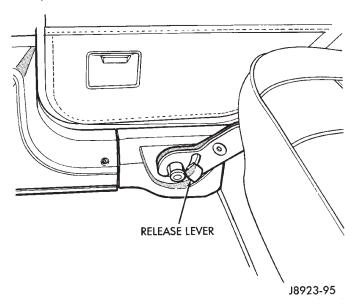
Seat Cushion Disengagement At Front INSTALLATION
